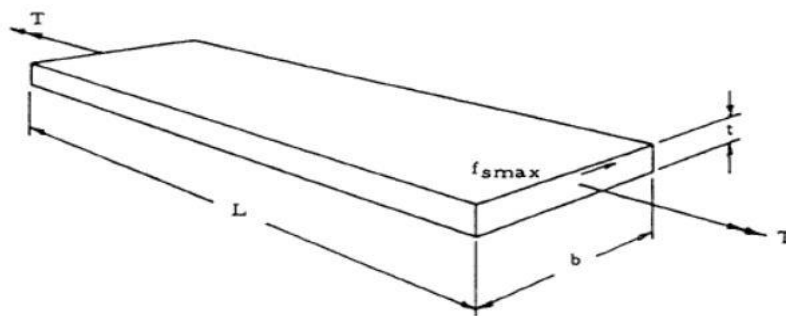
Torsion of rectangular cross section. (accessed from Engineering Library at 27/02/2020)
